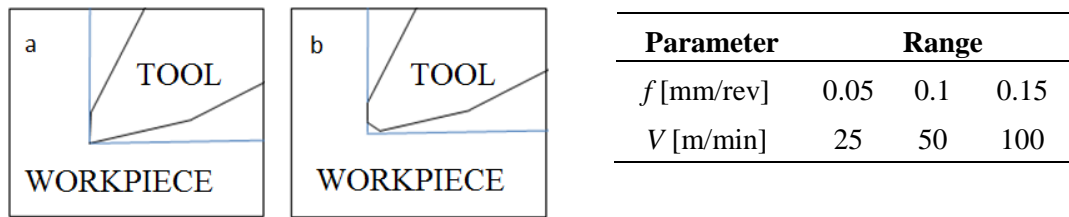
Edge geometry of the different tools used; (a) fresh tool and (d) honed edge tool and cutting parameters used in drilling tests: feed rate (f) and cutting speed (V).
